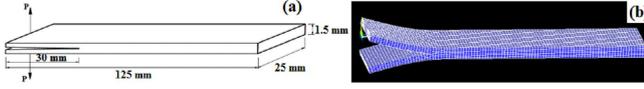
The cantilever beam: (a) dimensions, (b) finite element mesh.
